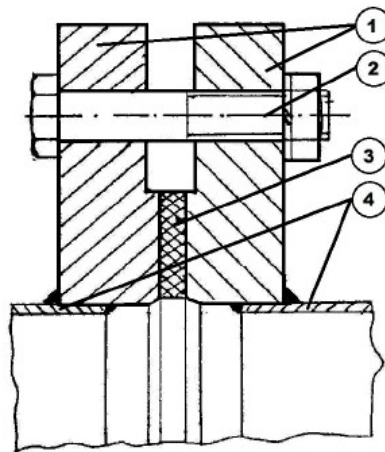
Flange connection type 01 B-1: 1 – flange; 2 – screw, nut, washer; 3 – gasket; 4 – pipe.
